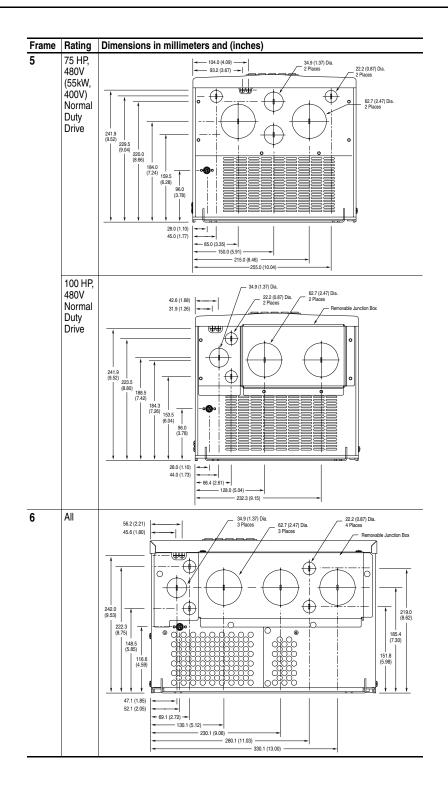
PowerFlex 700 Bottom View Dimensions
